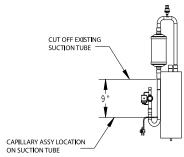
Swage Tool Not Available - Mark for Cutting
